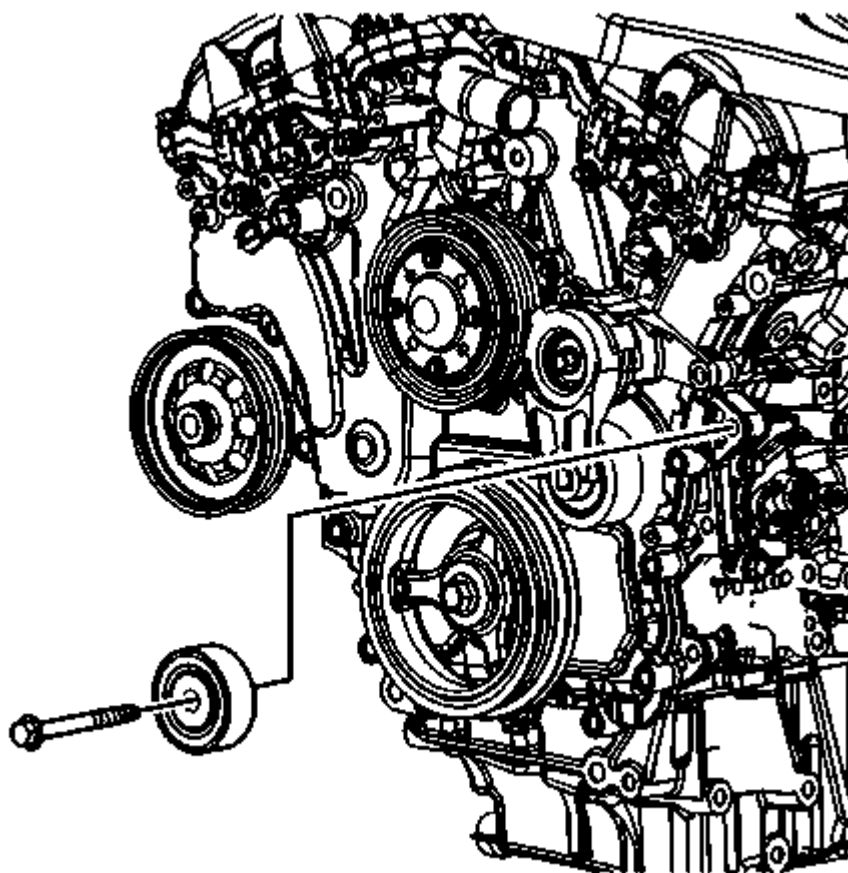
Identifying Drive Belt Idler Pulley & Bolt
